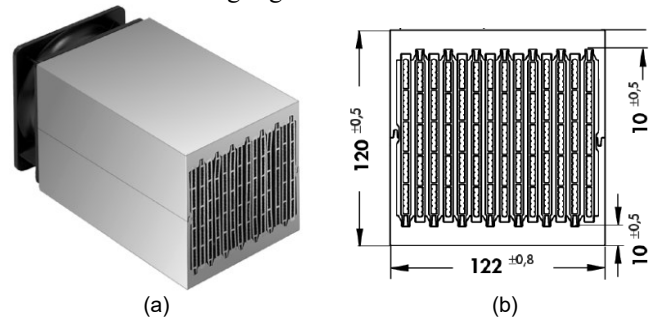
Hollow-fin cooling aggregates. (a) The prototype of heatsink; (b) Cross-section layout of heatsink
